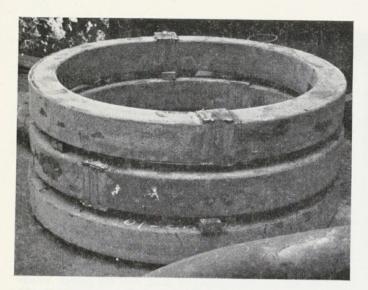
Electroslag welded flange rings $8\frac{1}{2}$ in. square section
